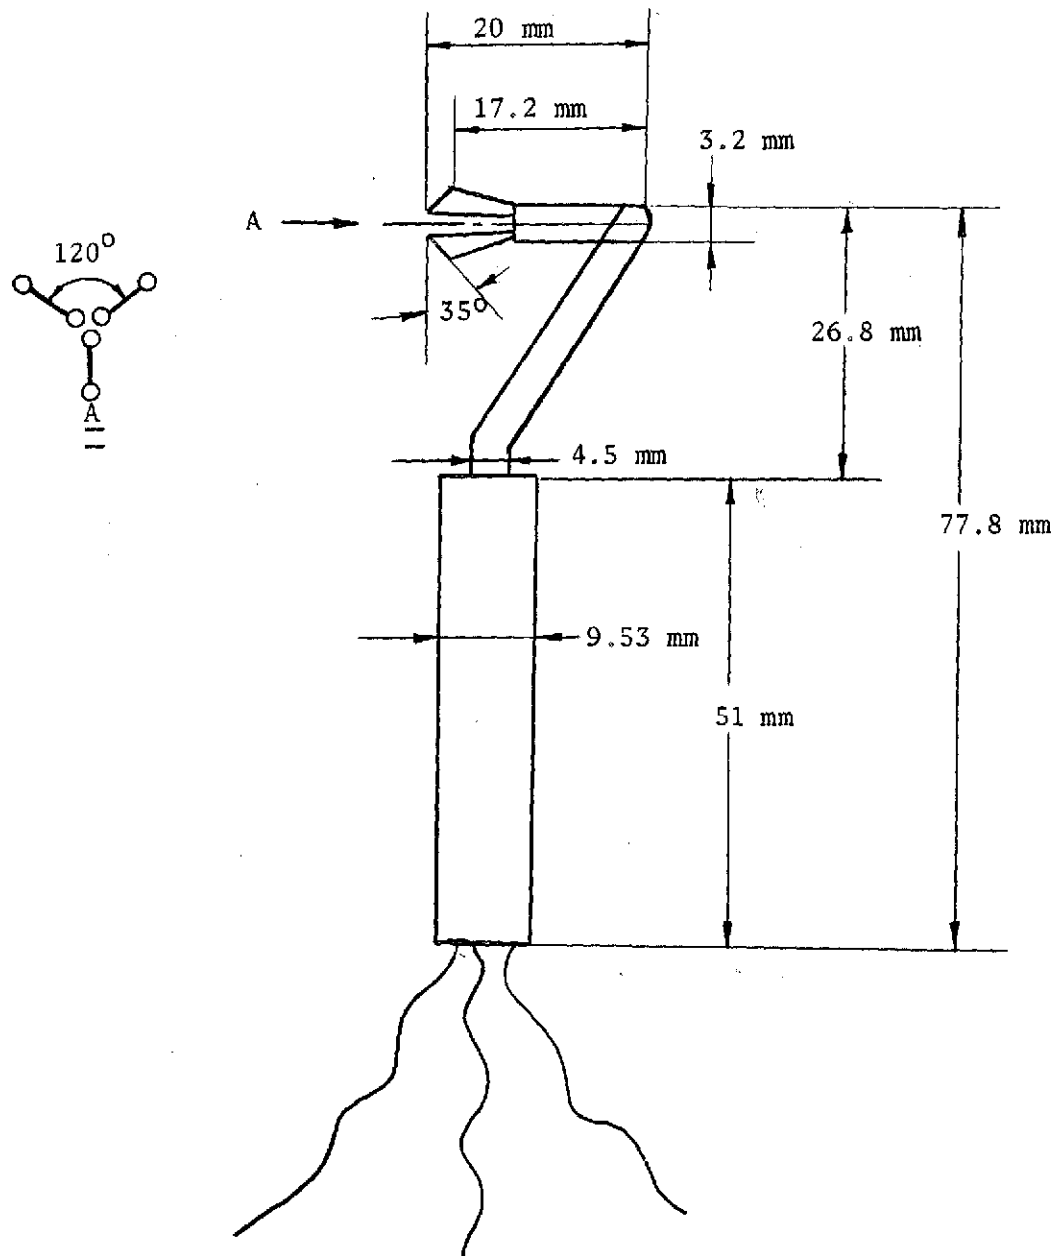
Three Sensor Hot Wire Probe Used in the Rotor Wake Measurements.
